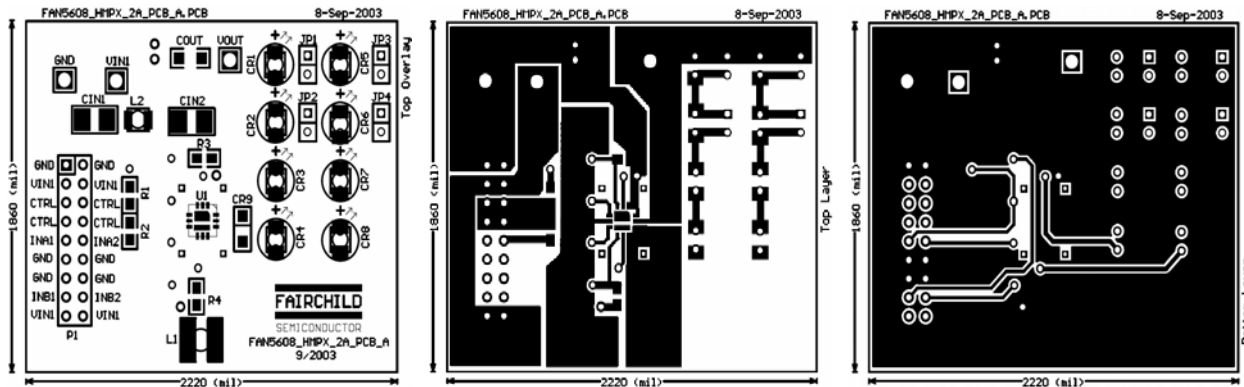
PCB Layout FAN5608 HMPX/DHMPX
